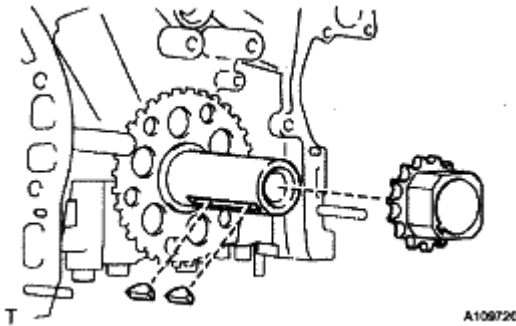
Identifying Timing Gear Set Keys & Timing Sprocket
